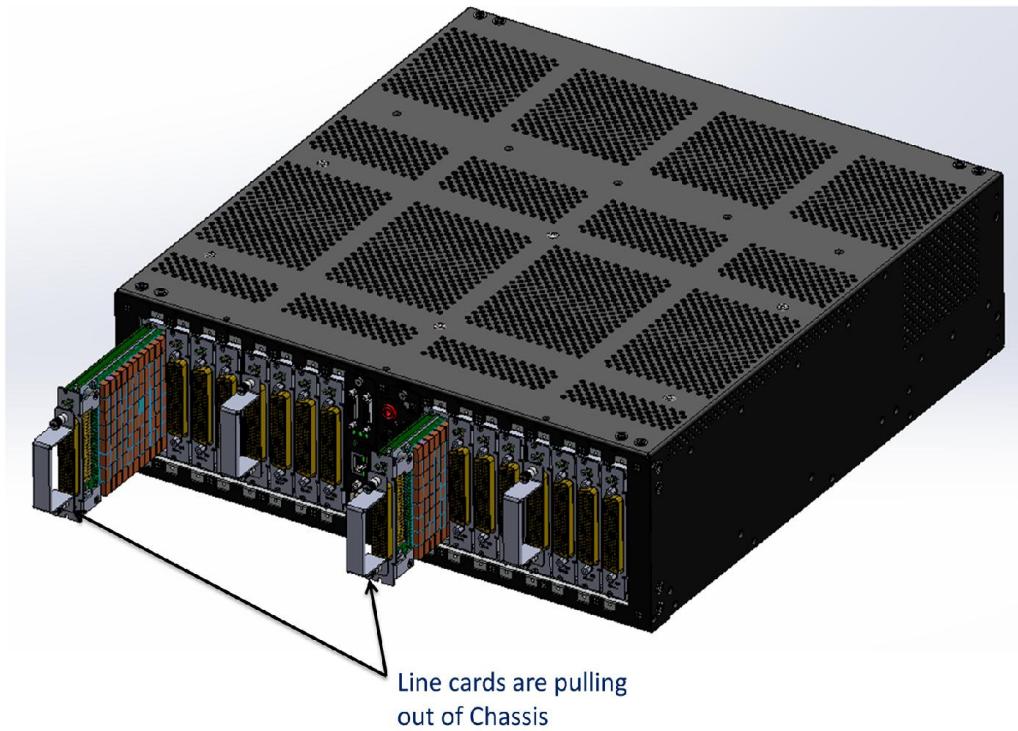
MULTIPLE SMP4 MODULE IN EX1268A CHASSIS DIAGRAM
